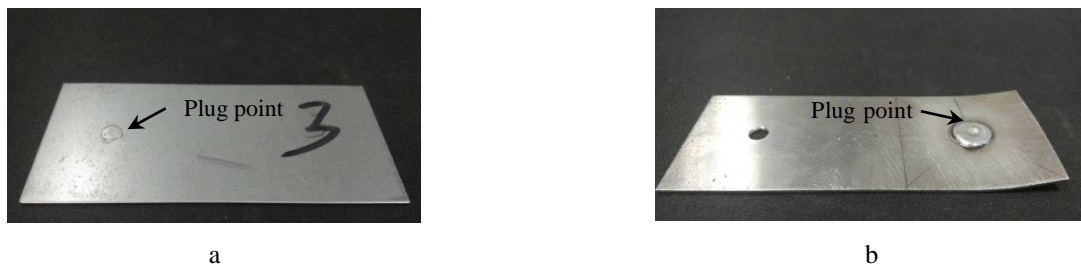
Steel sheet and aluminum sheet after tensile load test: a – steel sheet; b – aluminum sheet
